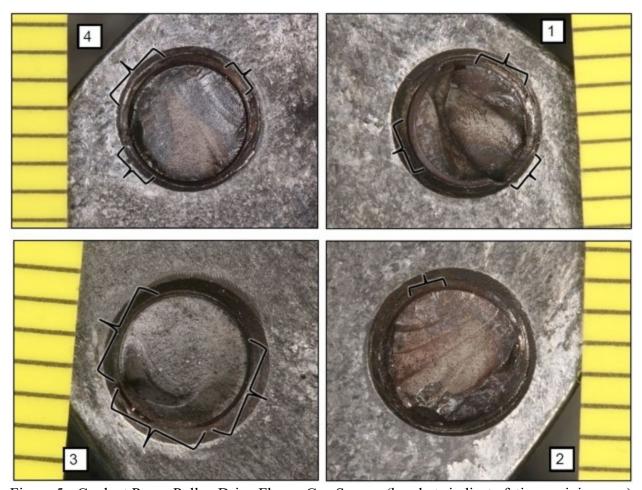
Coolant Pump Pulley Drive Flange Cap Screws (brackets indicate fatigue origin areas)
